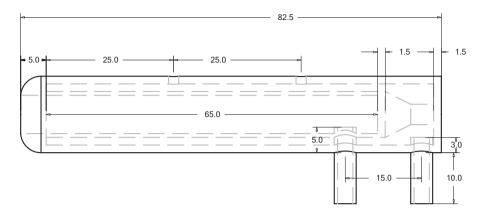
C1 Suggested 3D printed Pitot tube design.
